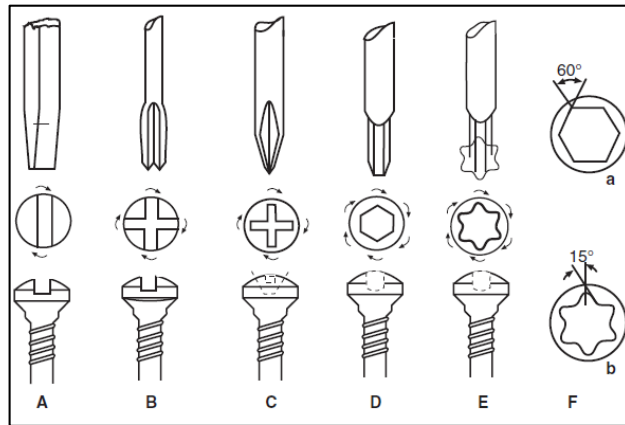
Common screw heads and driver tips of bone screws: Single slot (A), cruciate (B), Phillips (C), recessed hexagonal (D), Torx-6 Stardrive™ (E) [62].
